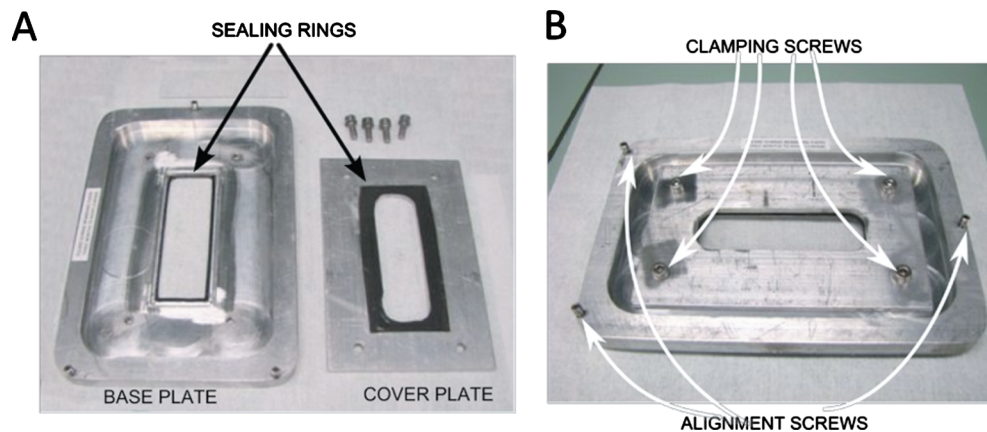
(Color online) Custom slide insert with tilt adjustment mechanism. (a) Picture of the different elements of the slide insert including a base plate and a cover plate machined in Al with a central opening, sealing rings, and four screws for clamping a glass slide between the base and cover plates. (b) Picture of the assembled plates. Three set screws on the outer edges serve as support of the slide insert on the microscope stage and allow adjusting the horizontality of the slide. The alignment is critical because when scanning over long distances, a slight misalignment could alter the gap between MFP and substrate significantly.
